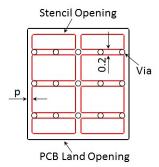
Stencil Openings Shall Not Cover Via Areas If Possible (Dimensions are in mm)
